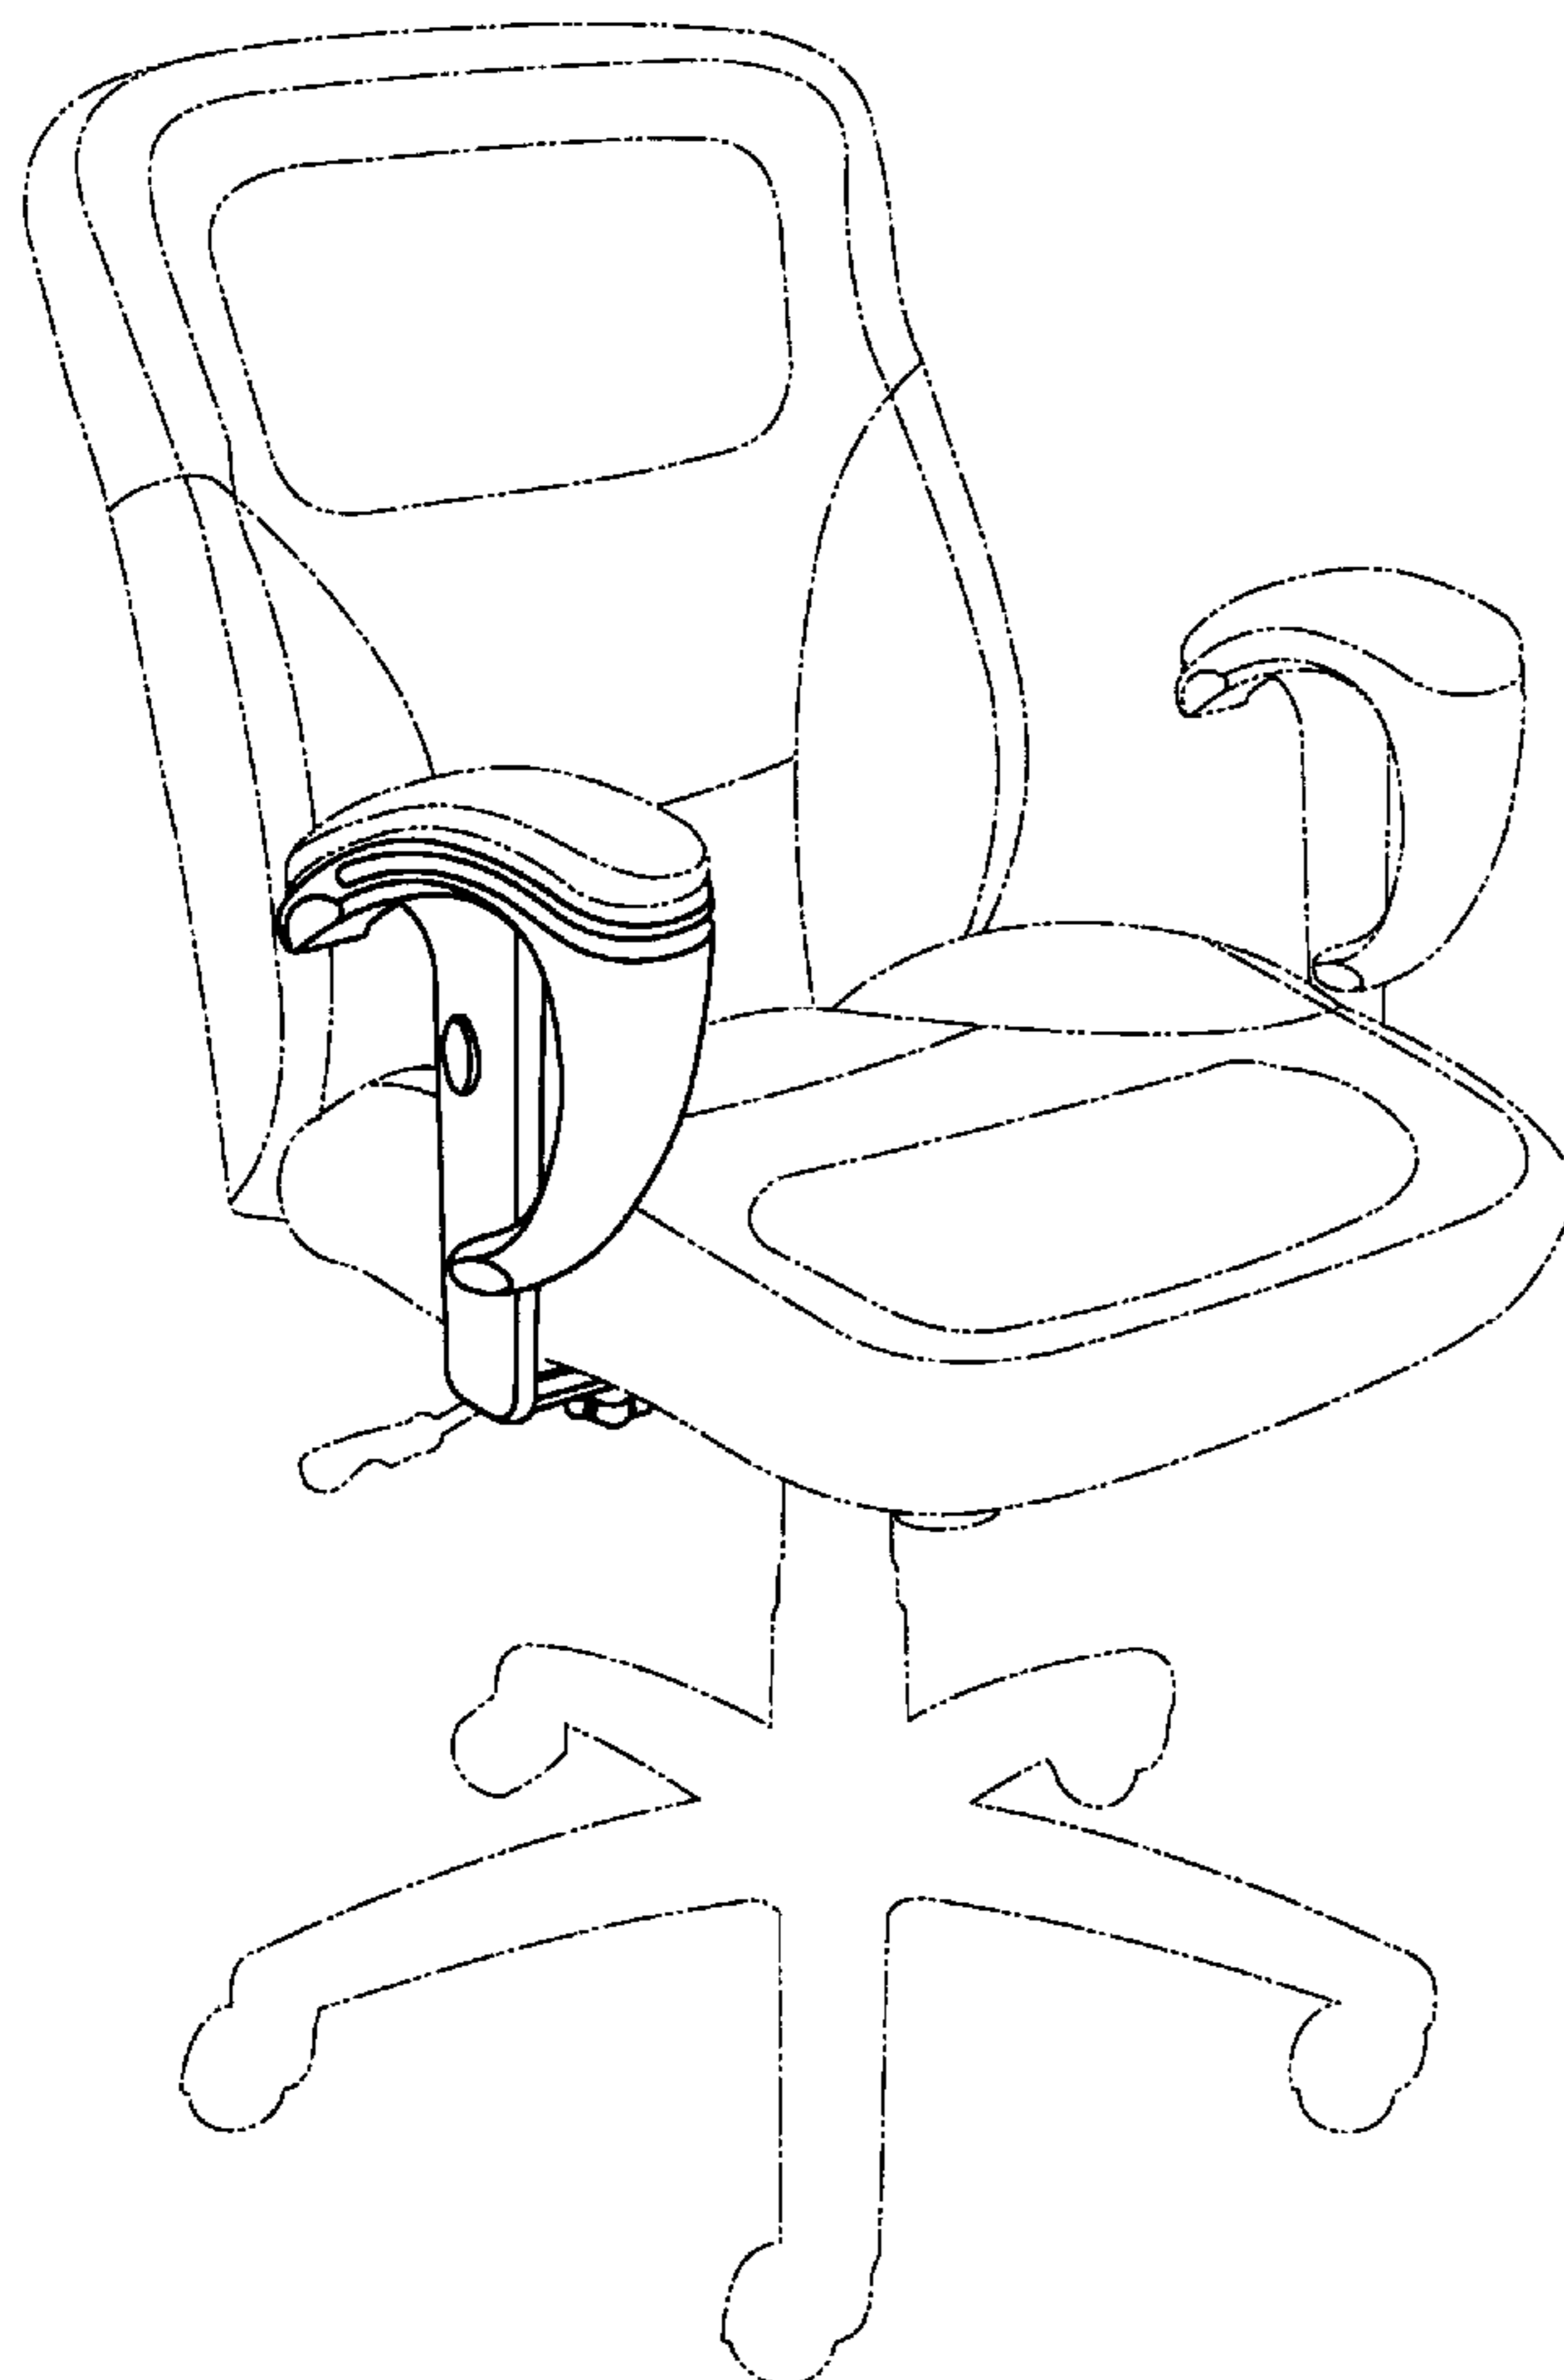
is an enlarged perspective view showing the front, left side and top thereof.
